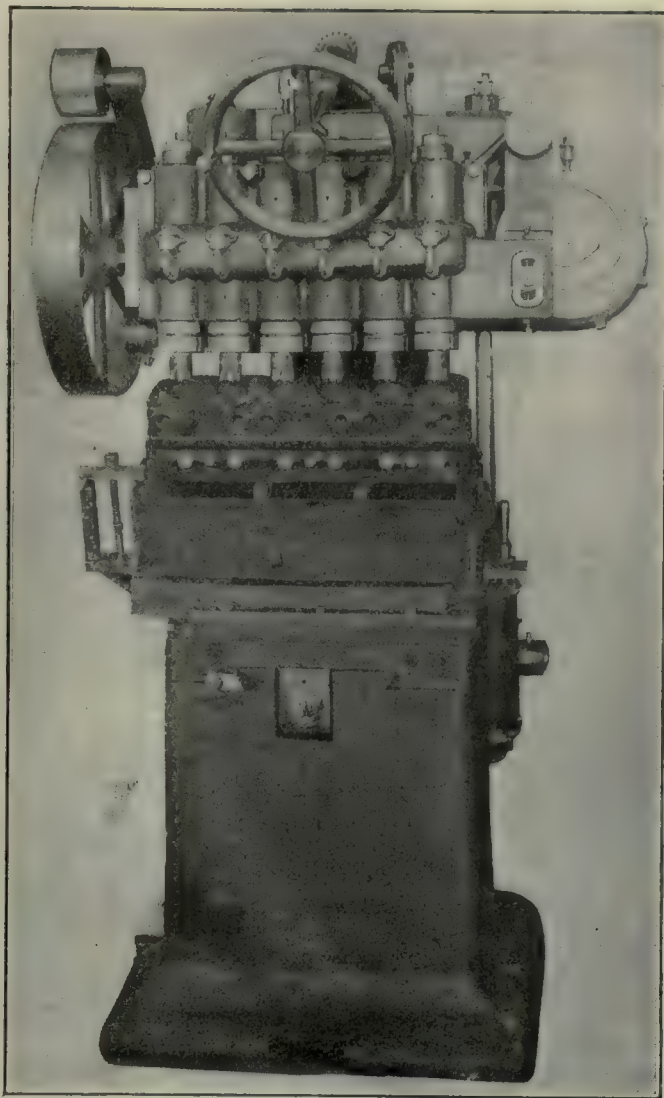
SIX-SPINDLE AUTOMATIC PROFILING MACHINE
